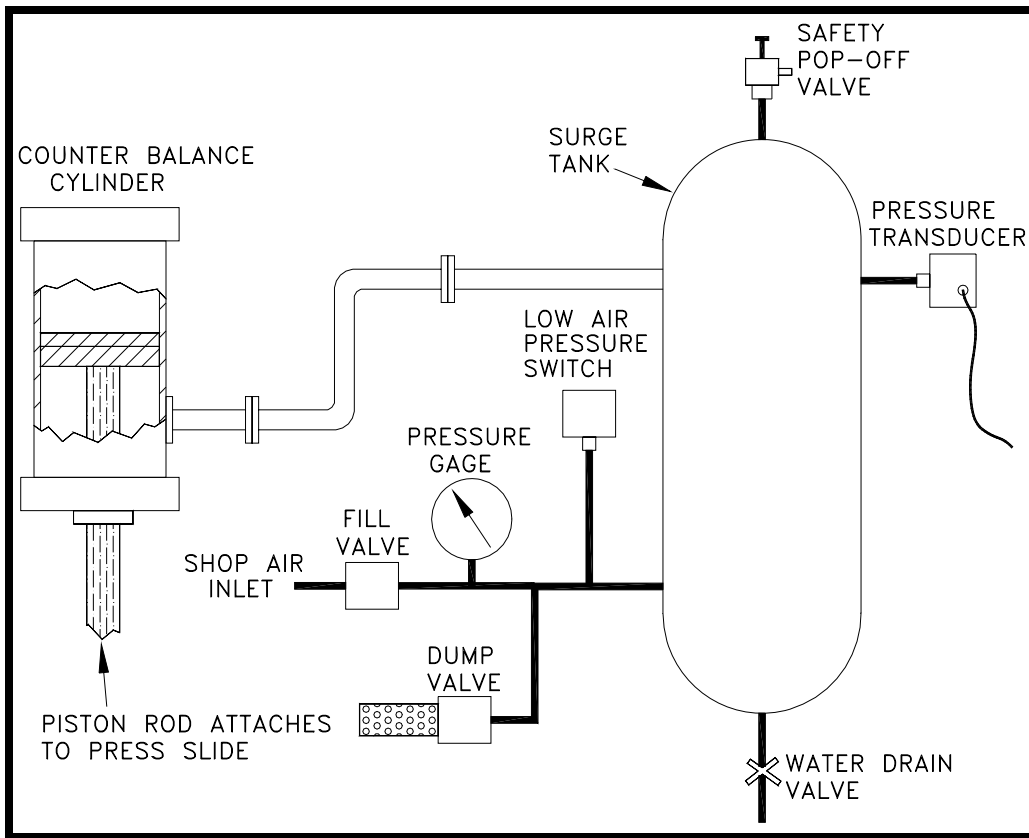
Auto-Counterbalance with Type "A" Integrated Valve
